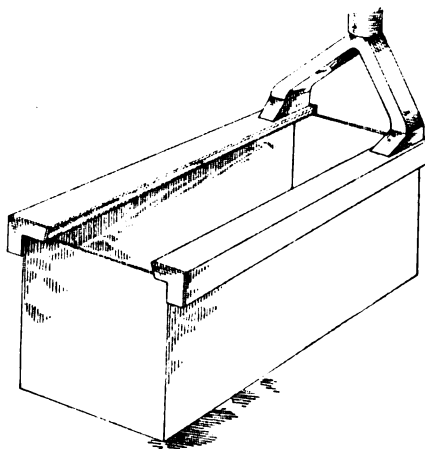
Perspective view of exhaust hoods on plating tanks shown in Fig. 1.
